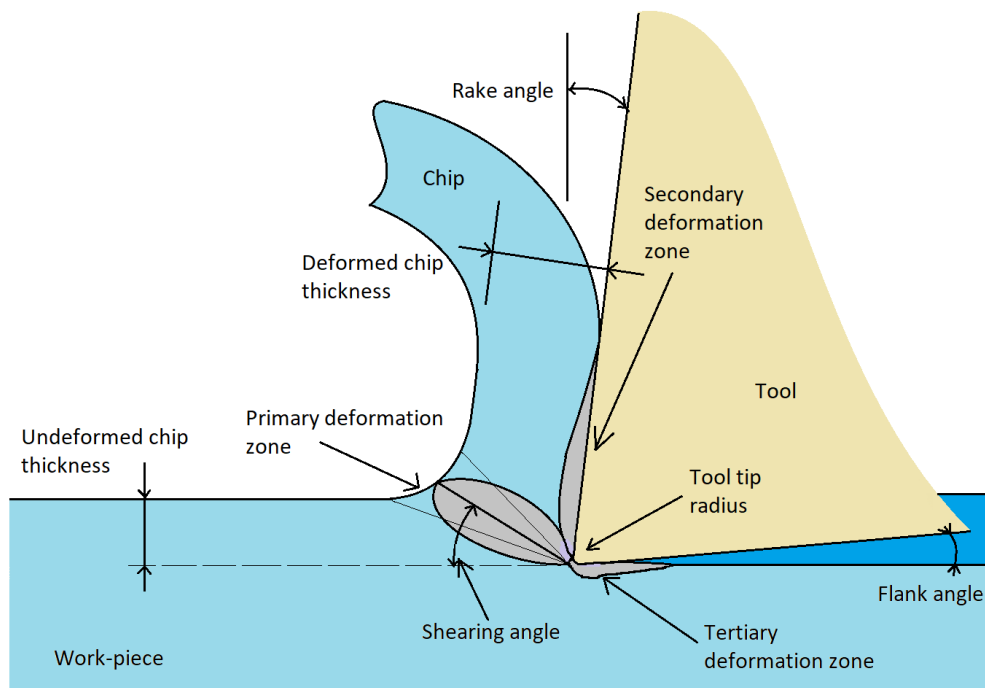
Chip formation mechanism and deformation zones, orthogonal cutting
